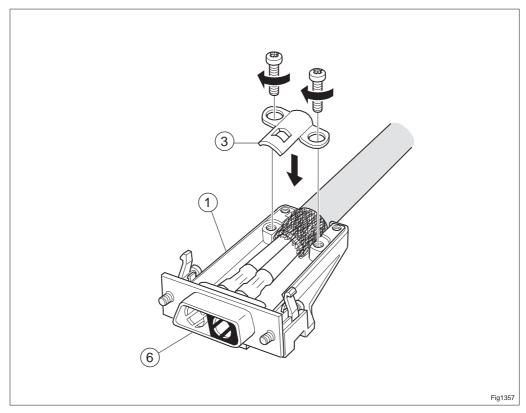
Assembling the connector in the connector casing using the clamp.
